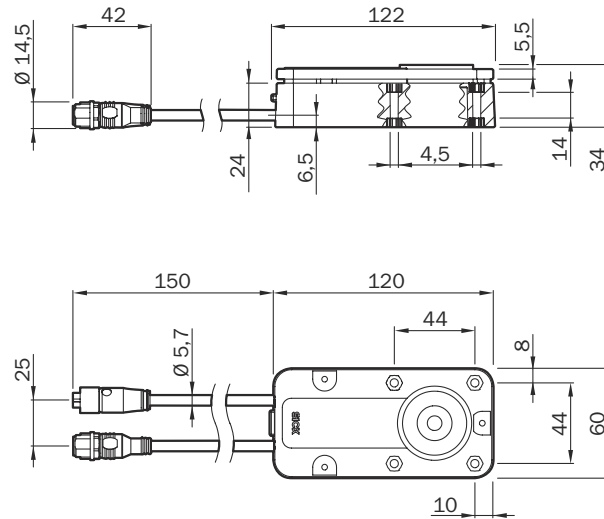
Dimensional drawing of MLP1 sensor with 2 × M12 male connector
